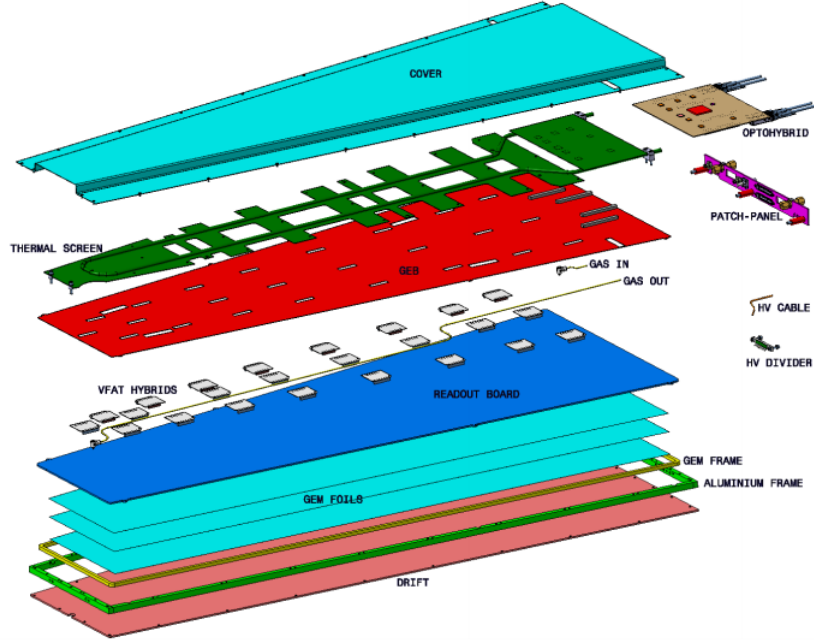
Exploded view of the mechanical design of the detector [6].
